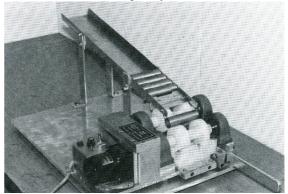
Example of application of sealant to outer circumference of liners for coolant passages (Pressure coating method using rollers)
